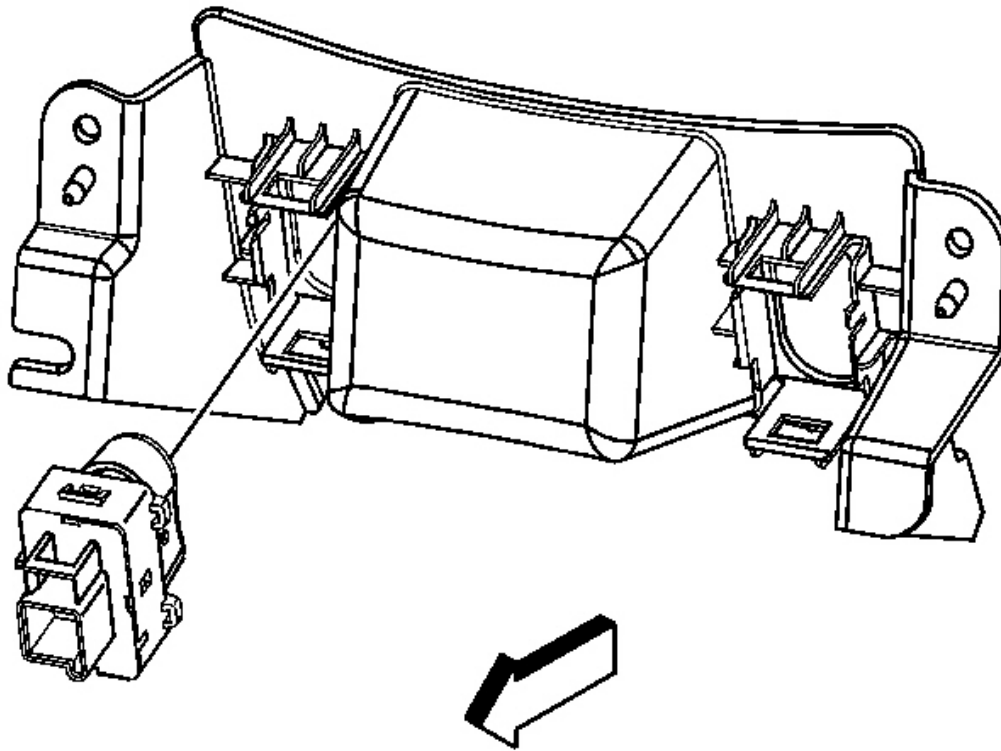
View Of Front (Passenger Side) Heated Seat Switch
